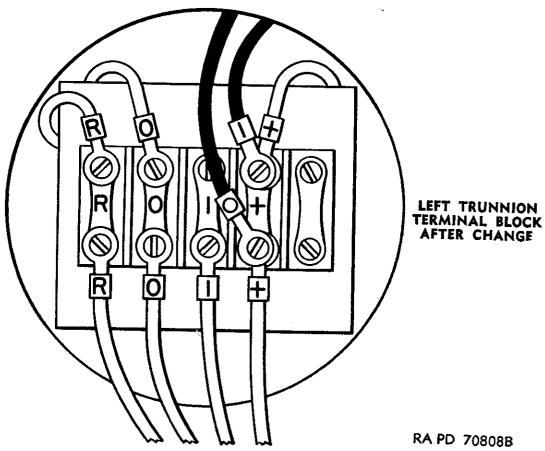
Wiring change—Disengaging elevation interrupter switches.
